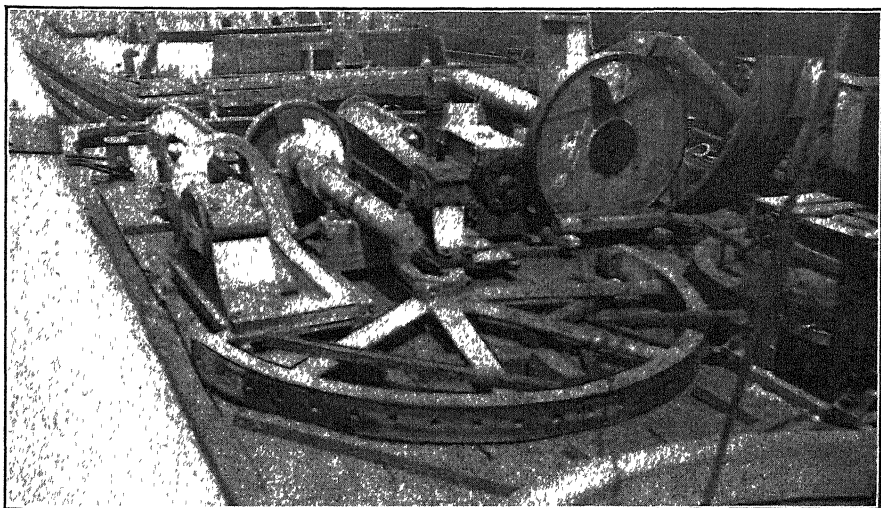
Parts of 18-in. \times 42-in., 22-in. \times 36-in. and 30-in. \times 60-in. Corliss engines for shipment to the Philippine Islands. Note skidding and cradles for crank-shafts; boxing around crank-pin; protection at ends of pillow-blocks; and skidding and crating of cylinder.
